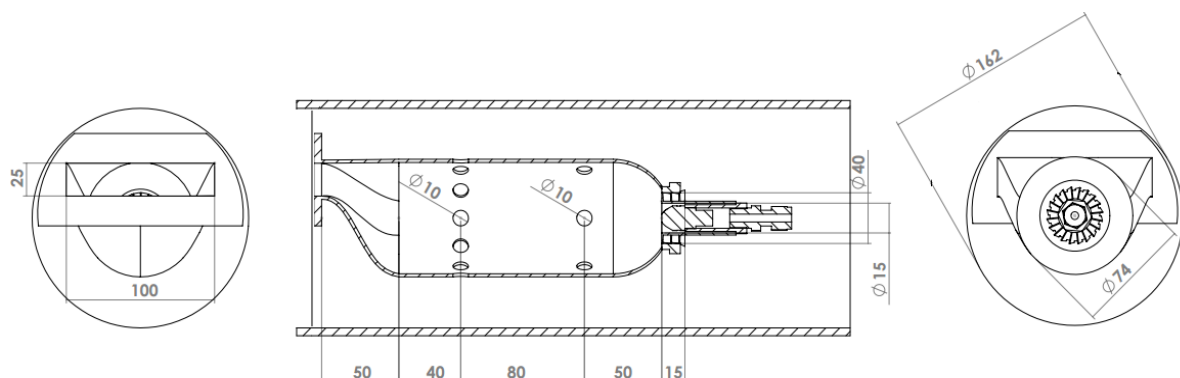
Combustor Arrangement with swirler, injector and connectors (Dimensions are in mm)
